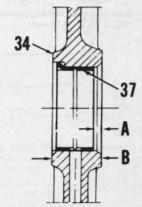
Depth (A) of bearing (37) in end support (34) should be 5 mm. Support width measured at (B) is 33.90-33.95 mm.
